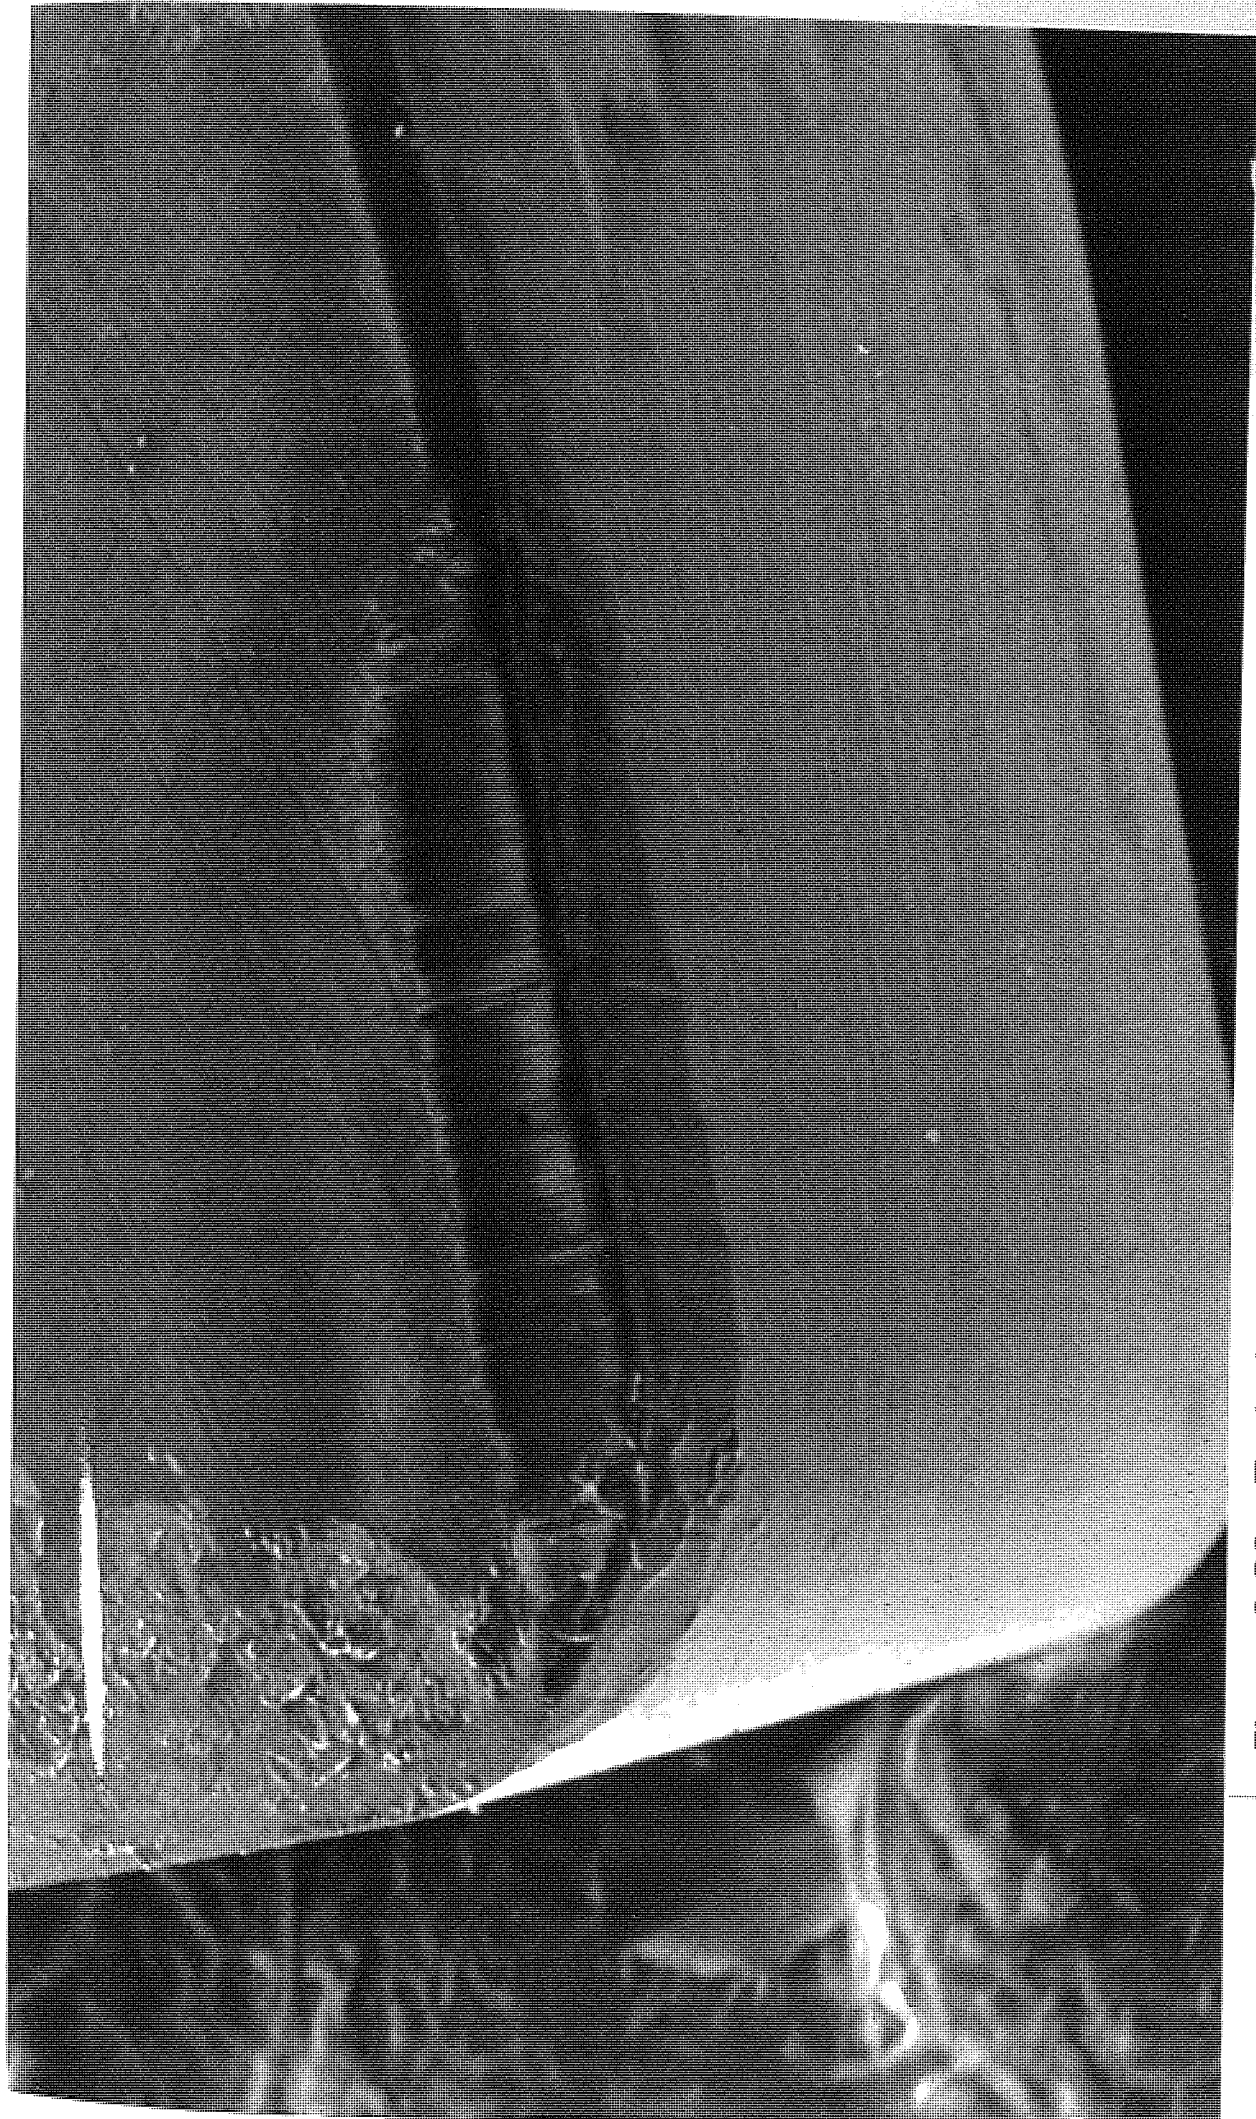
Typical wear on cutting edge ( $f = 0.33$  mm/rev)
